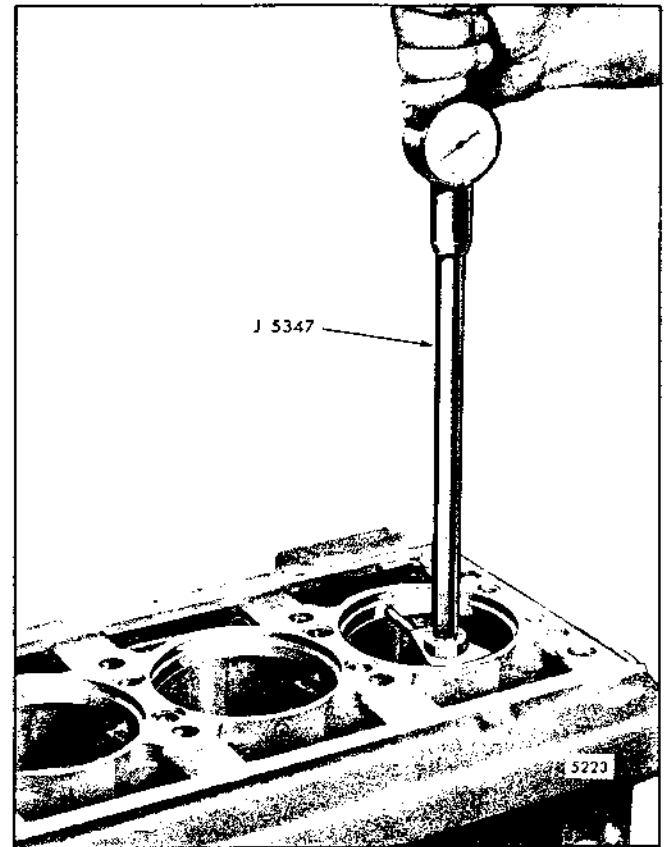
Checking Cylinder Block Bore with Tool J 5347
